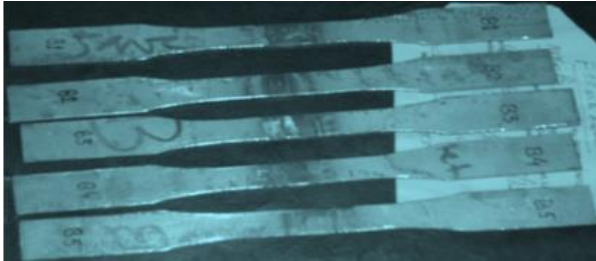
(b) MIG welding welded tensile specimens using ER309L filler metal.
